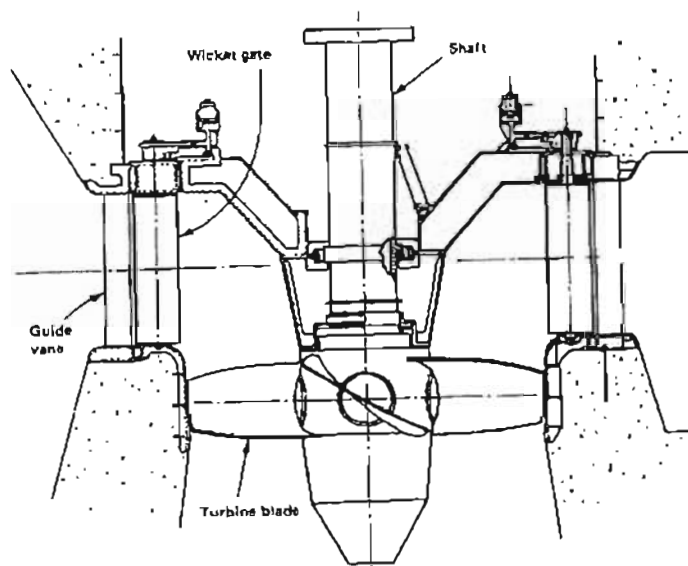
1 Cross-sectional view of propeller turbine, Warnick (1984)
